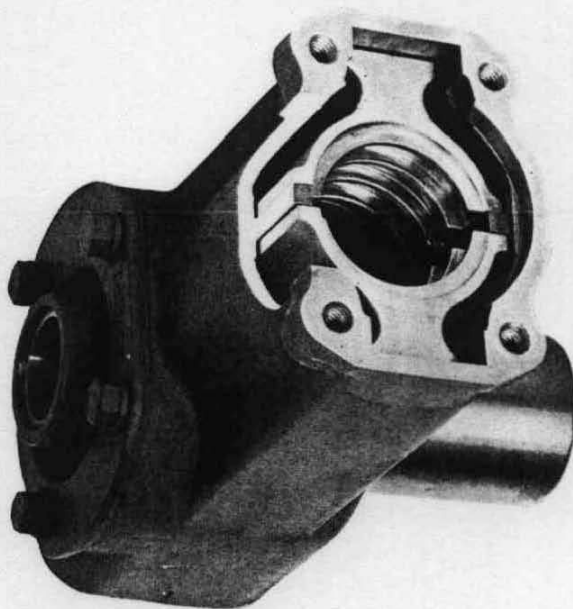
1929 Steering Gear. Half Nuts Guided at Back and Front.
